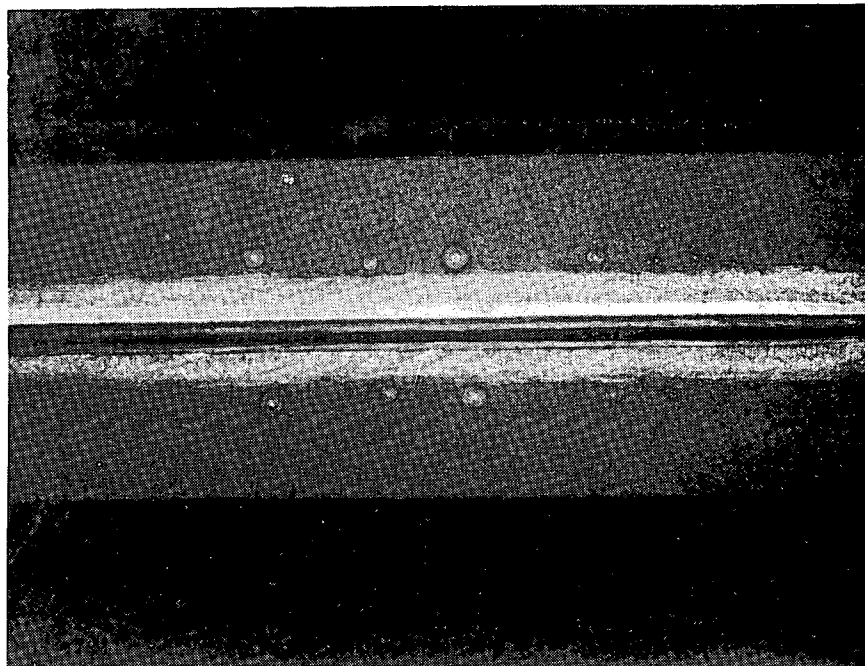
Longitudinal view of fractured surface of weld on 0.080-in. (0.203-cm) thick Mulberry. Weld parameters used were 100 kV, 5.5 mA, 30 in. (76.2 cm)/min ac deflection across the weld joint (11.5 X).
